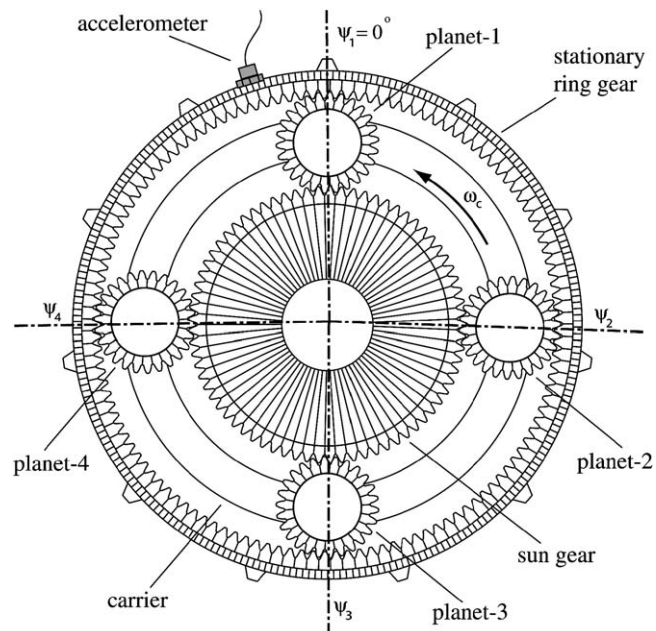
A schematic showing the components of a 4-planet planetary gear set and an accelerometer mounted on the ring gear.
